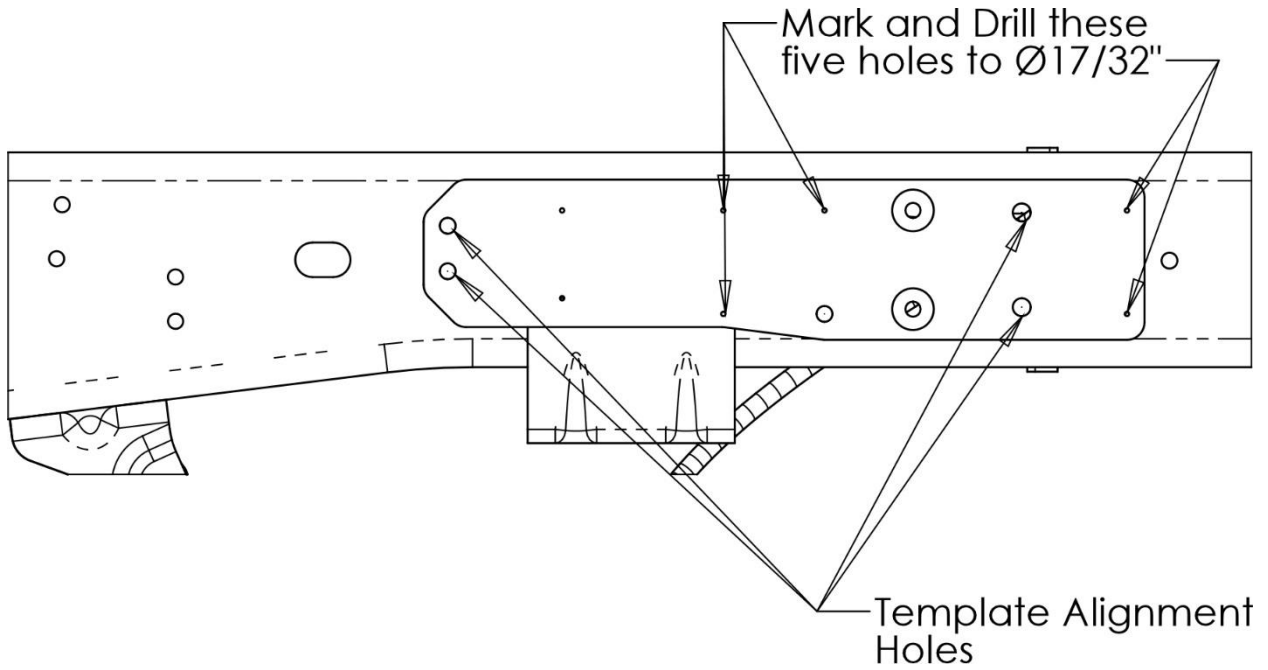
Driver Side Upper Strut Mount Frame Drilling
